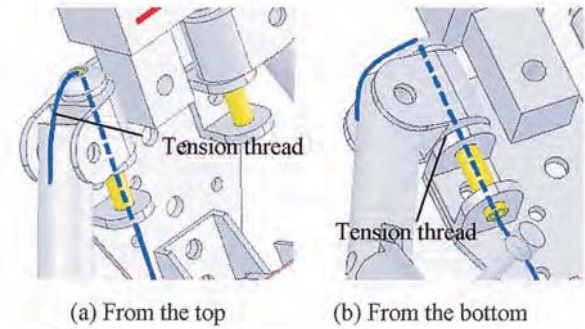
Rolling mechanism of shoulder by tension of thread.
